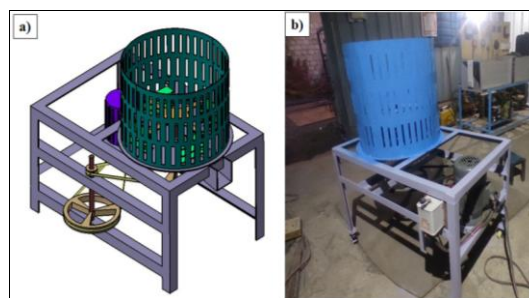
(a) CAD model of areca nut dehusking machine, (b) fabricated areca nut dehusking machine
